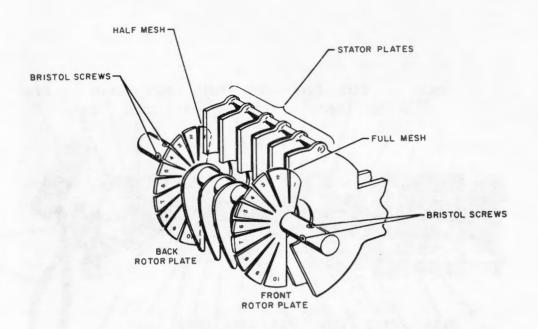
RF and PA Amplifier Assembly, Tuner Z108
